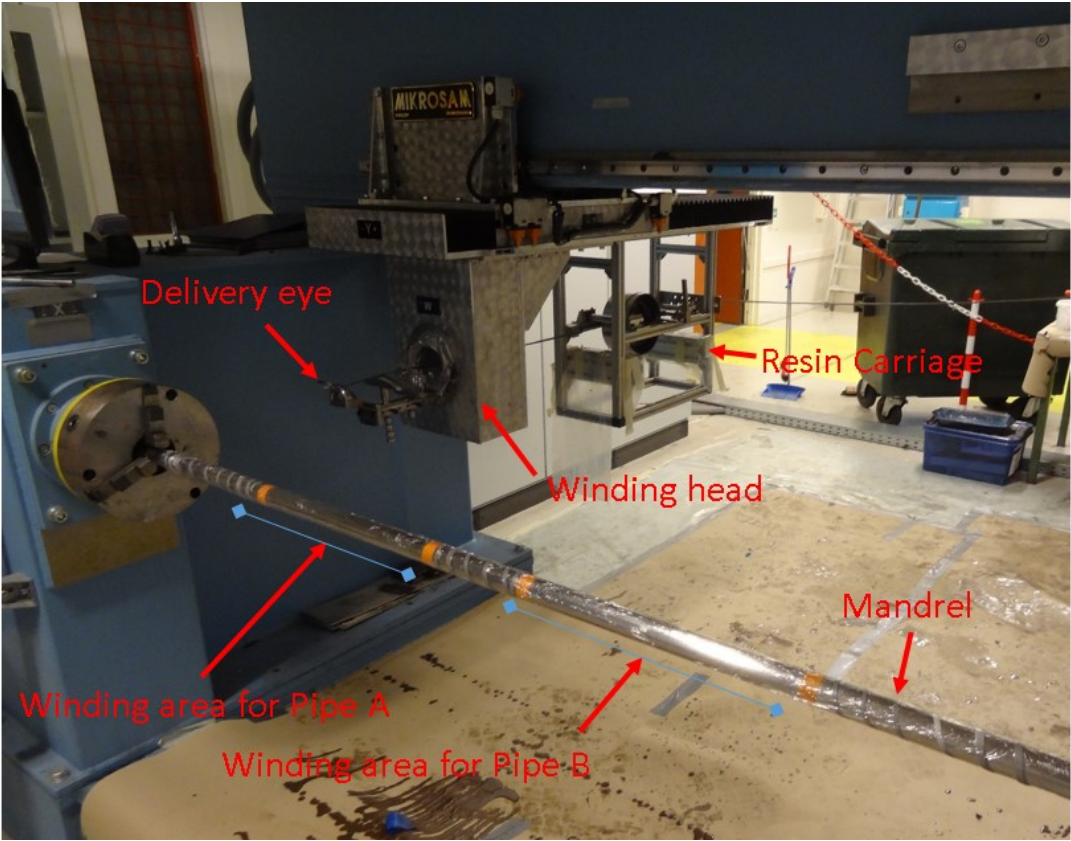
The machine correctly set-up and ready to wind the pipes.
